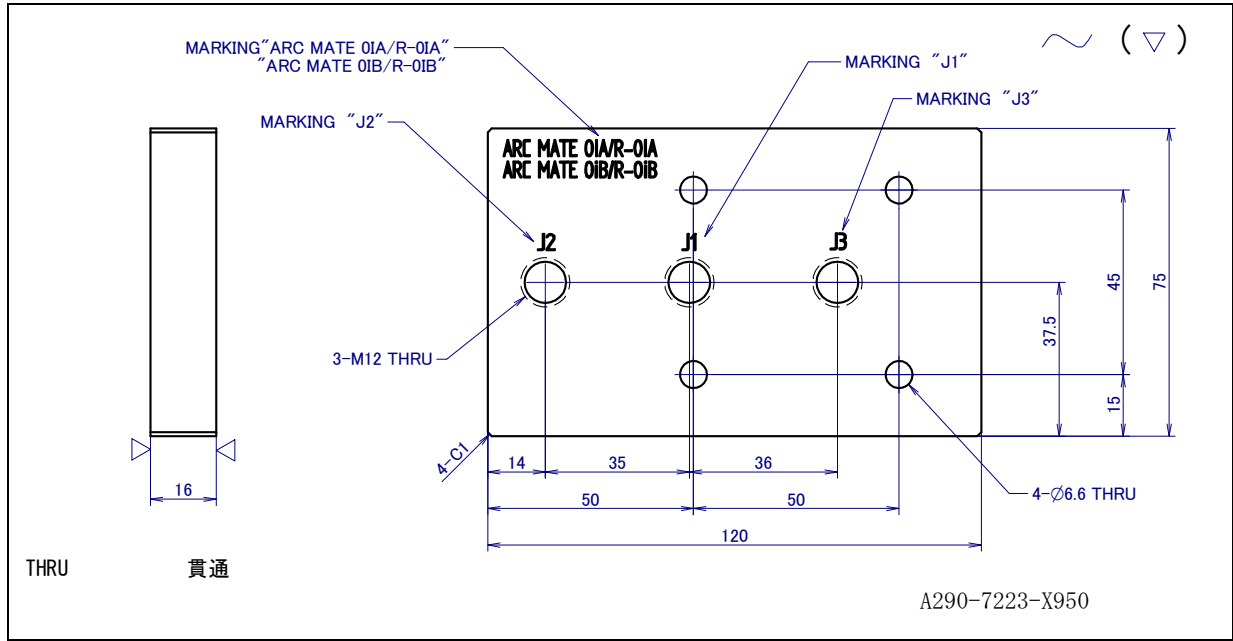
(a) J1/J2/J3-axis reducer hanging fixture (A290-7223-X950)
